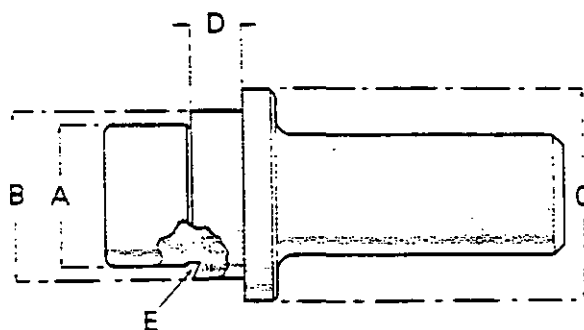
TOOL FOR FITTING 620053 NEEDLE ROLLER BEARING
